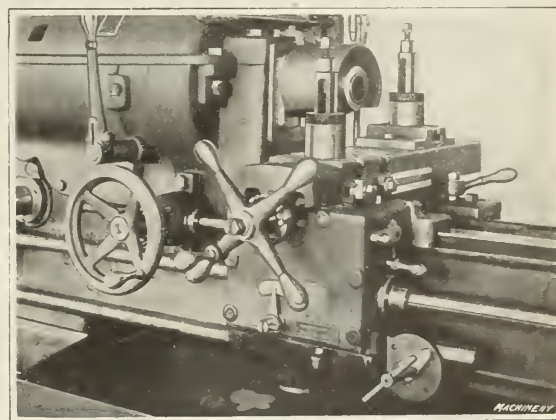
Close View of Cross-slide on Foster Screw Machine
